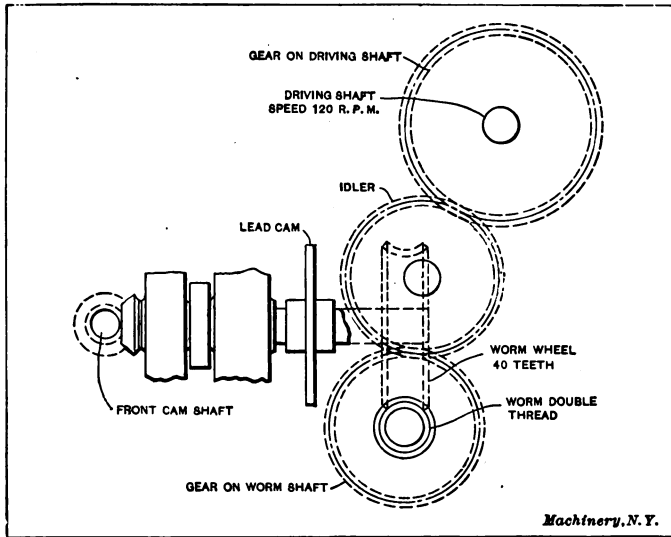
Diagram of Gearing on the No. 00 Brown & Sharpe Automatic Screw Machine
